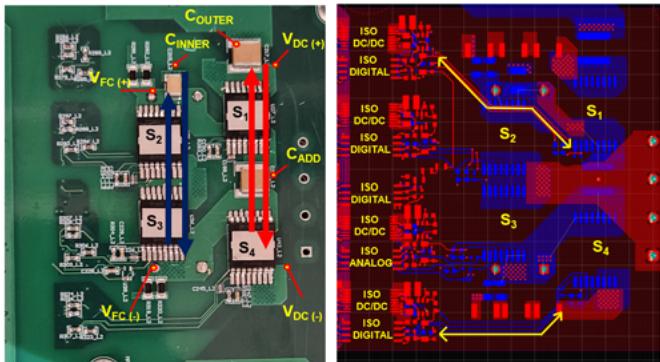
Bottom view of a flying capacitor switching leg plus printed circuit board layout view (top and bottom layers).
